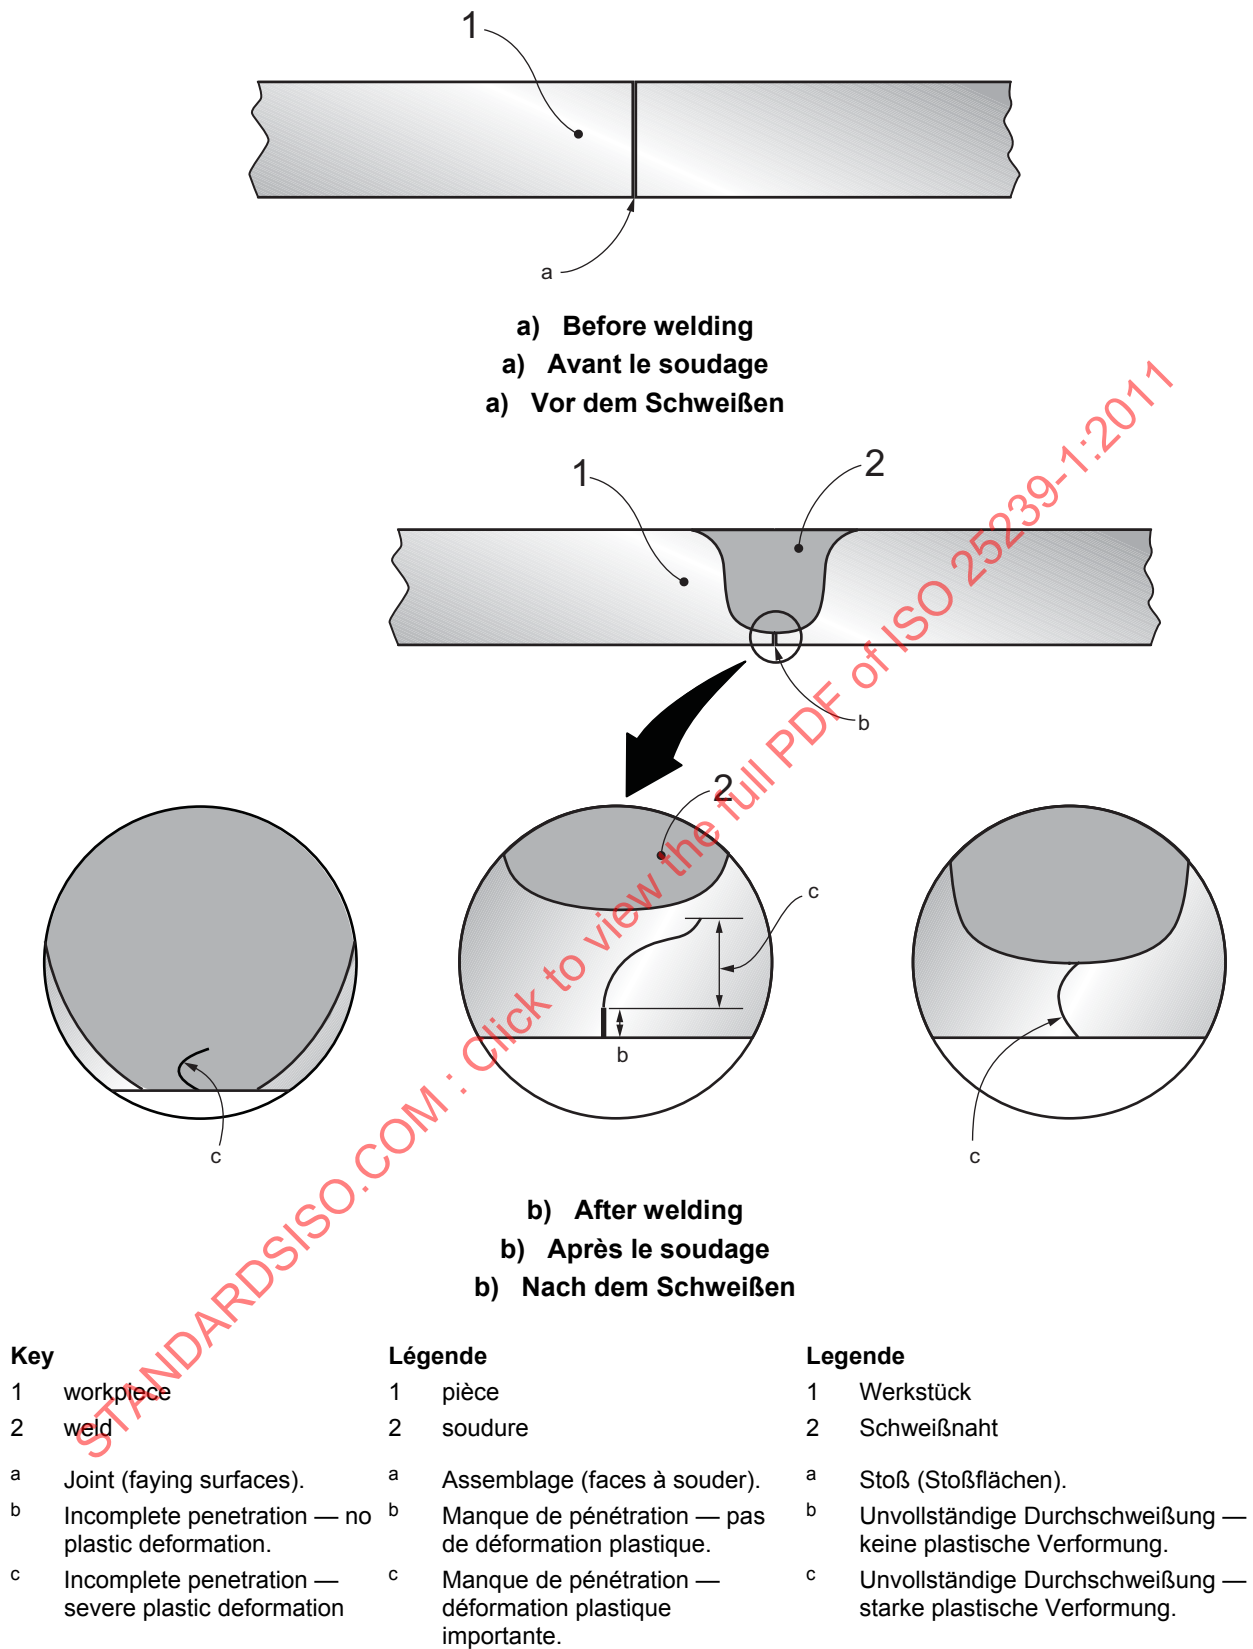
Macrosection of a butt weld showing incomplete penetration
